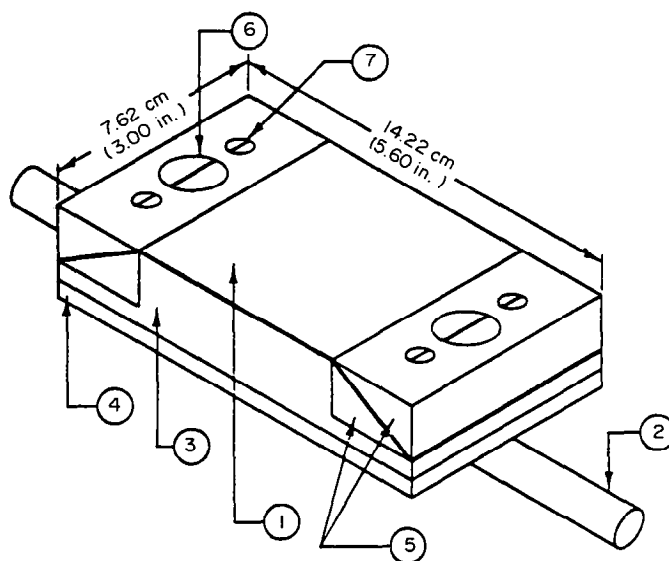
Test section assembly: 1, stainless steel foil; 2, support shaft; 3, Teflon insulation; 4, support plate; 5, bus bar; 6, brass bolt; 7, flat head brass screw.
